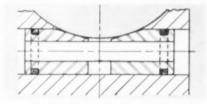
To maintain register, a groove is turned in periphery of each clamping member.
